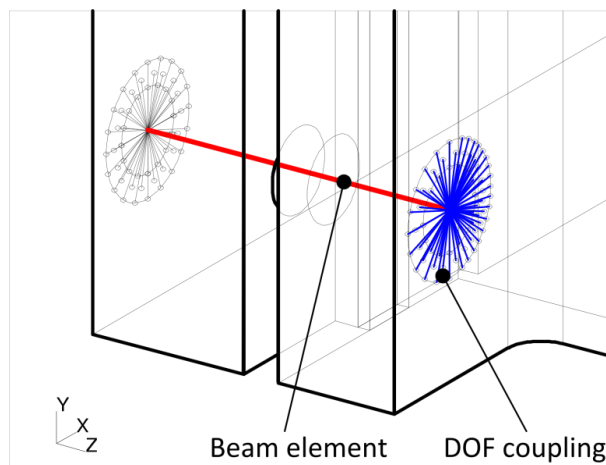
Coupled bolt model illustrated on the header box geometry
